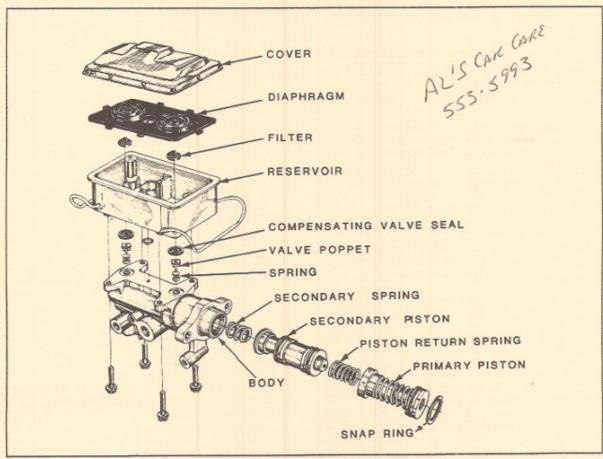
Bendix Mini-Master Cylinder - Exploded View
